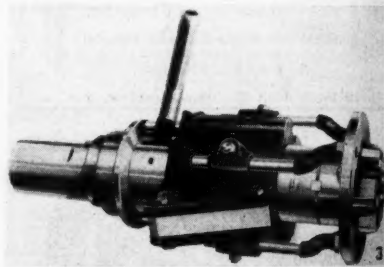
Landis Style LM Receding Chaser Collapsible Tap.
